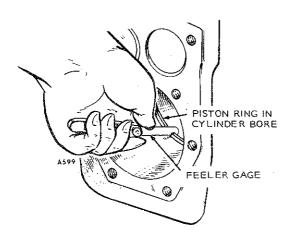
FITTING PISTON RINGS TO THE CYLINDER
